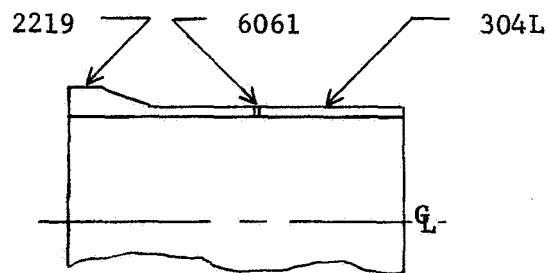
Final Machining of Inertia Welded Joint
